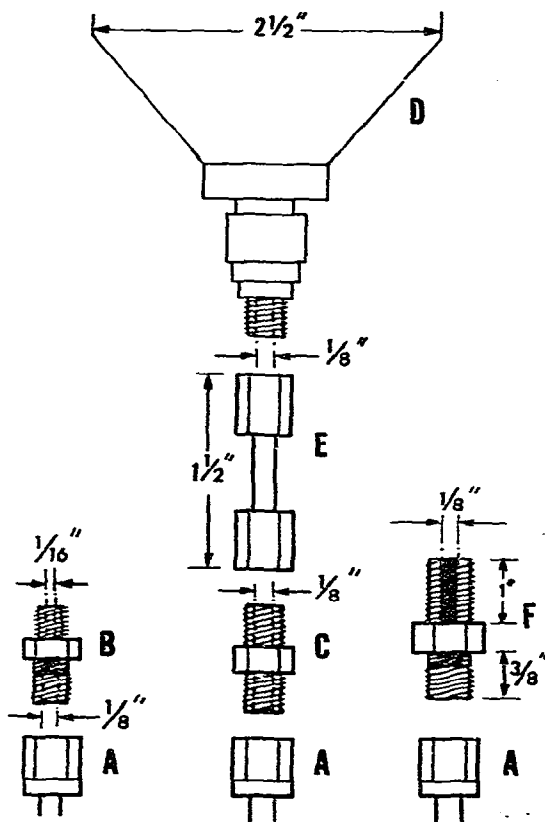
Column assemblies (exploded view). Left, end fitting. Middle, packing assembly. Right, sample fitting. A = End of 1/8-in. O.D. column with female fitting; B = "zero dead volume" end fitting with removable 2- μ m fritted disk; C = male-male union; D = funnel with male thread; E = PTFE tubing with female fittings; F = sample fitting, containing silica gel and a filter paper disk in the top and a fritted disk in the bottom portion.
